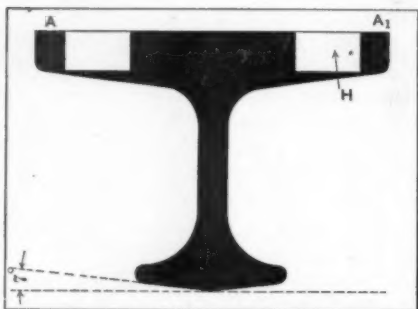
Section of a front axle, showing the spring plate on which the spring should seat firmly
